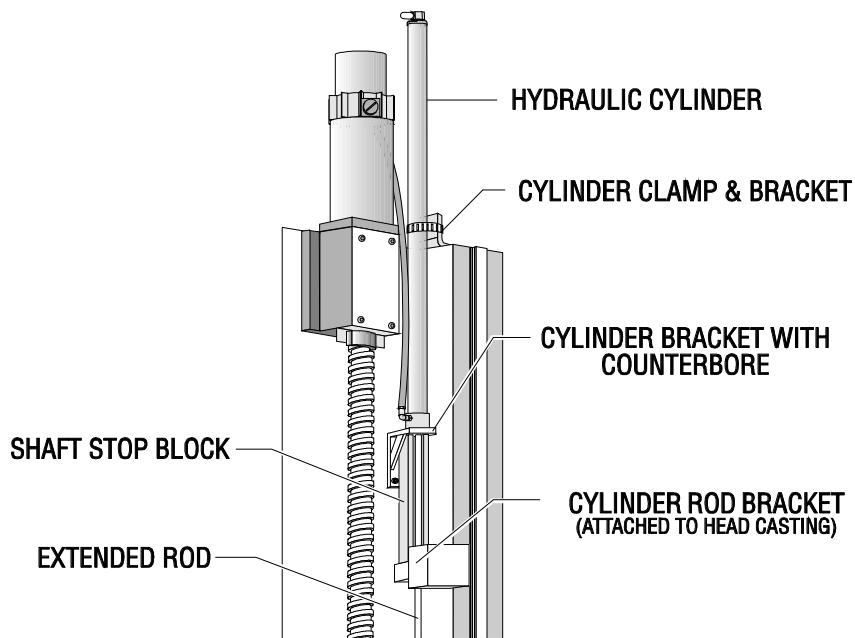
Z-axis motor and components for machines equipped with hydraulic counterbalance.
